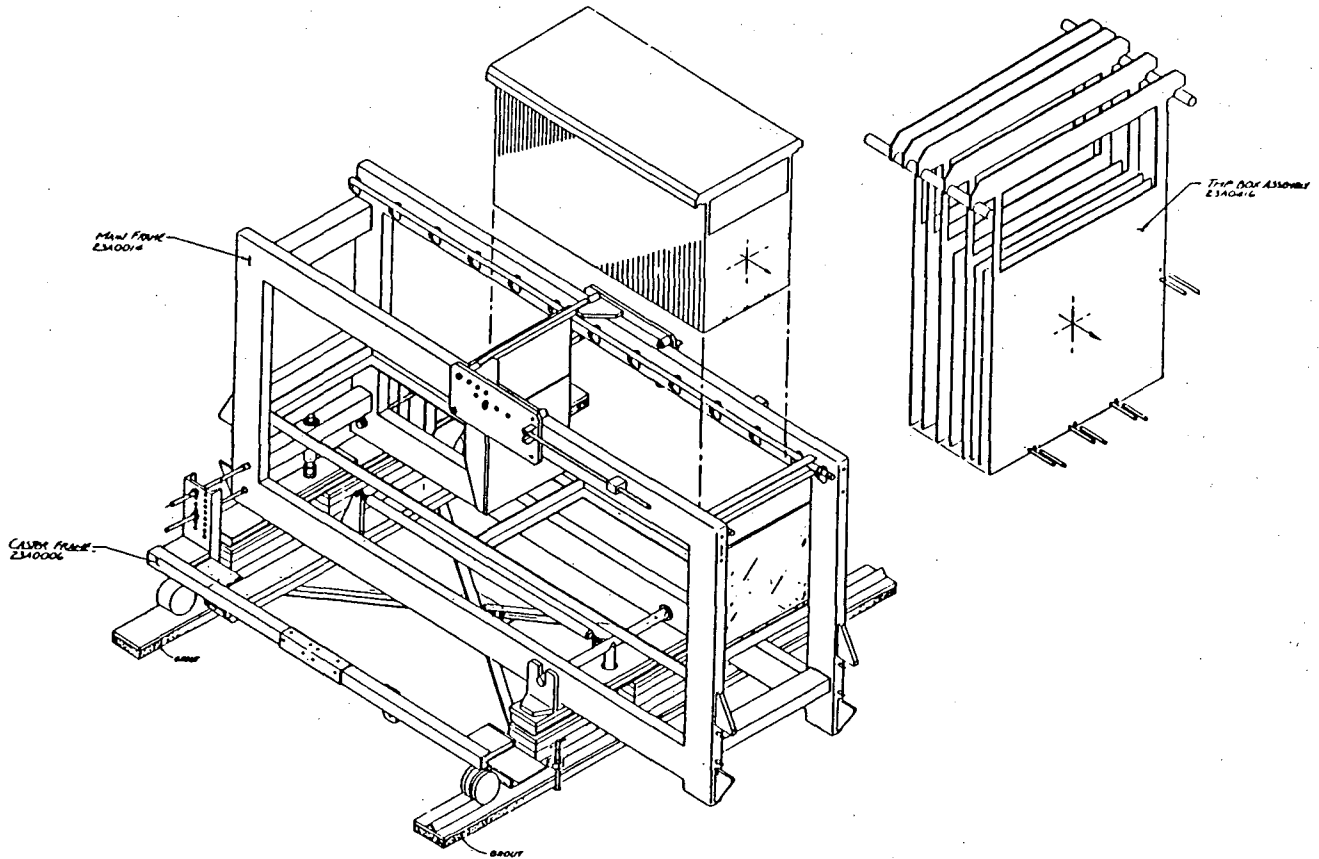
Isometric layout of WALIC hanging frame TMP calorimeter.
